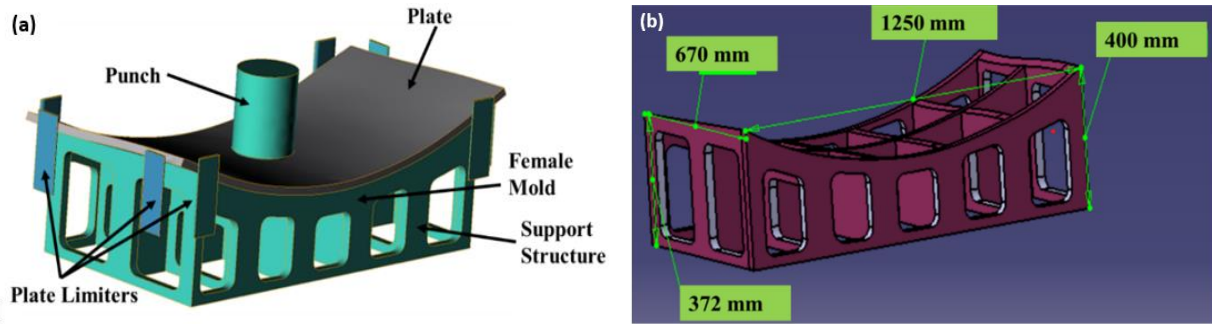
a) Female Mold Dimensions, b) Assembly of the System.
